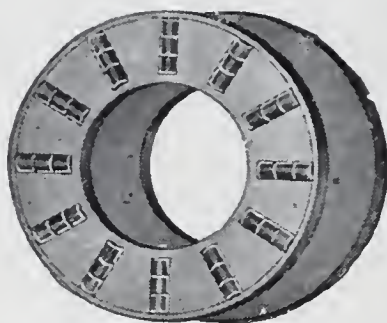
PLAIN ROLLER THRUST BEARING.
